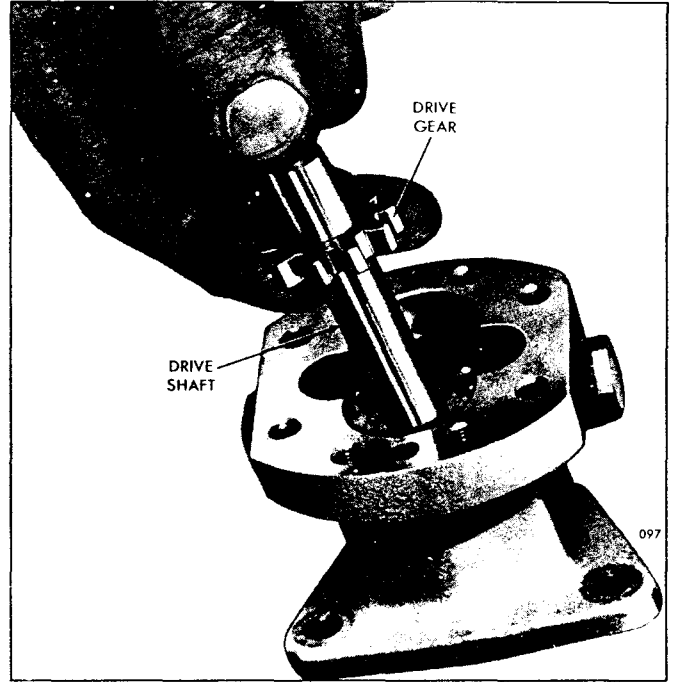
Installing Fuel Pump Drive Shaft and Gear Assembly
